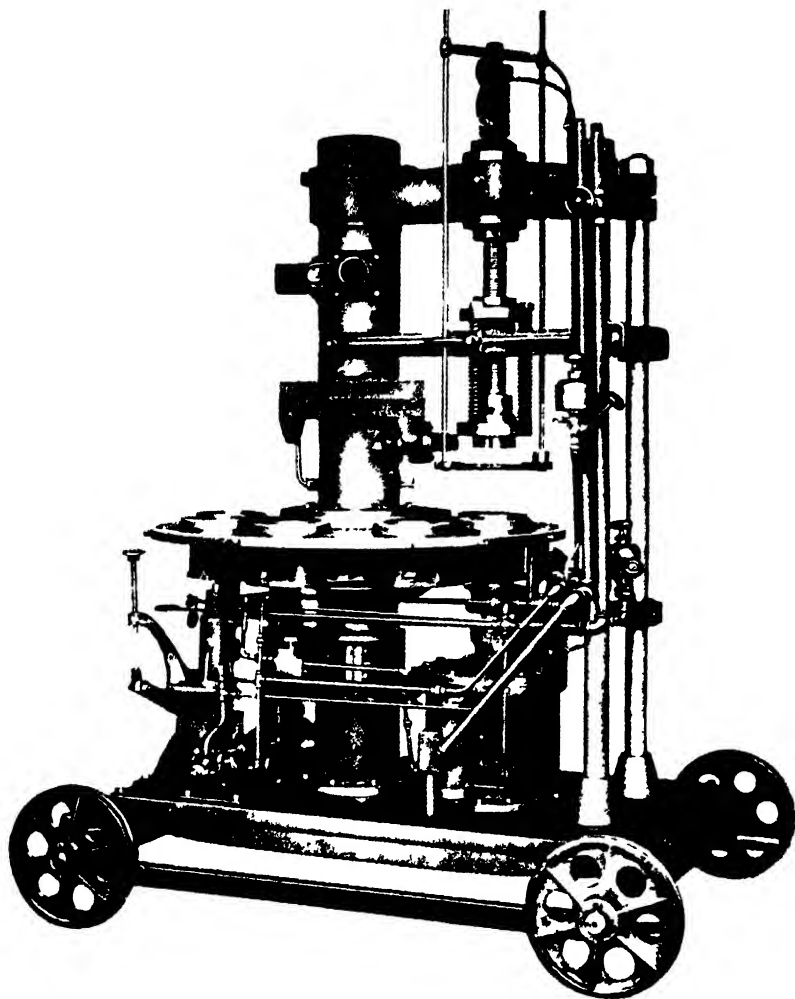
THE E. MILLER PRESSING MACHINE.
